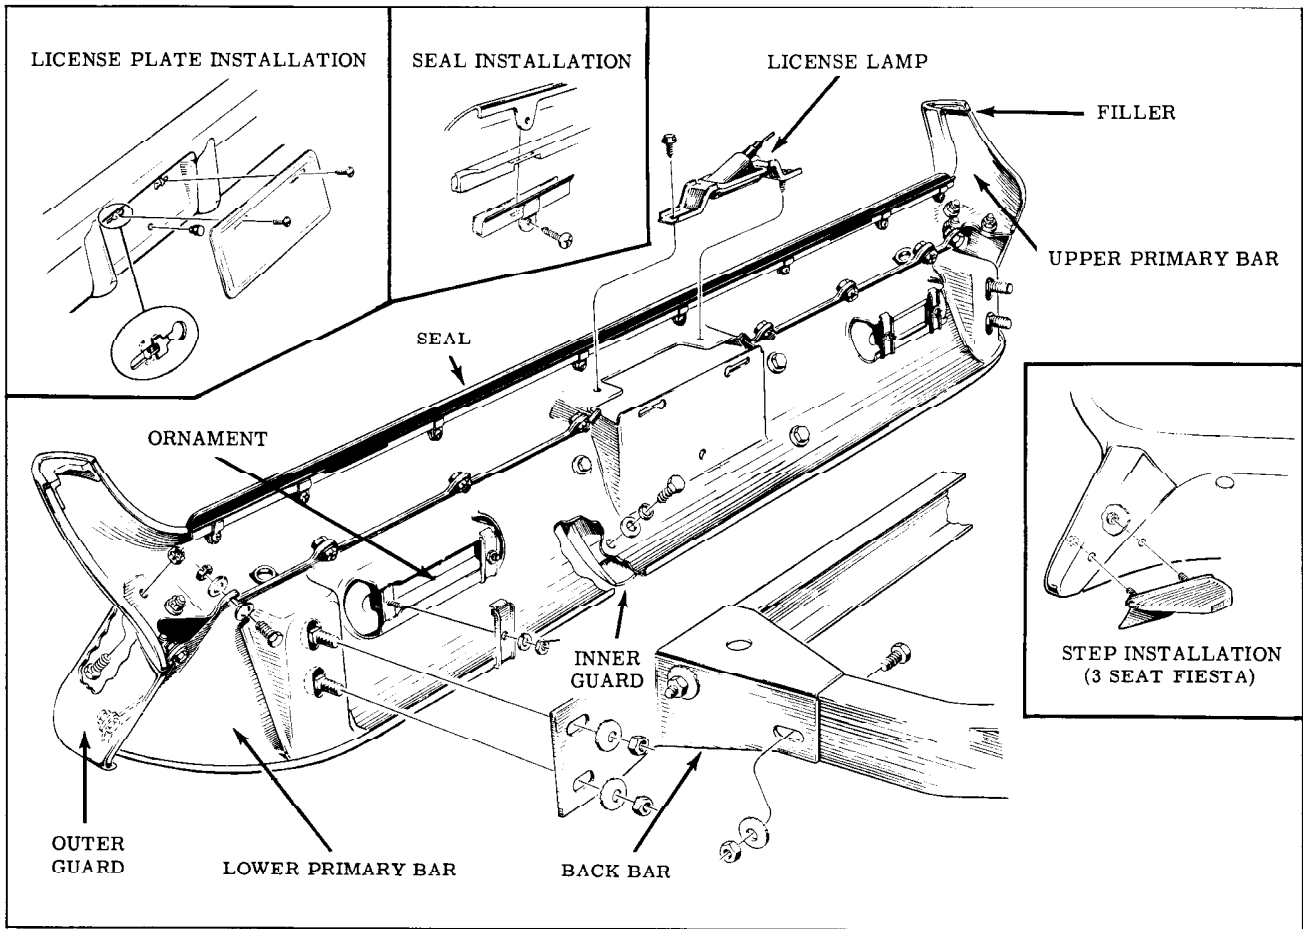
Rear Bumper Assembly (Fiesta)
